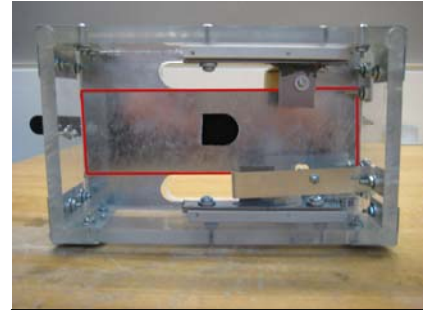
The lower metal sheet is outlined in red. This metal sheet creates the track which the blade slides in
